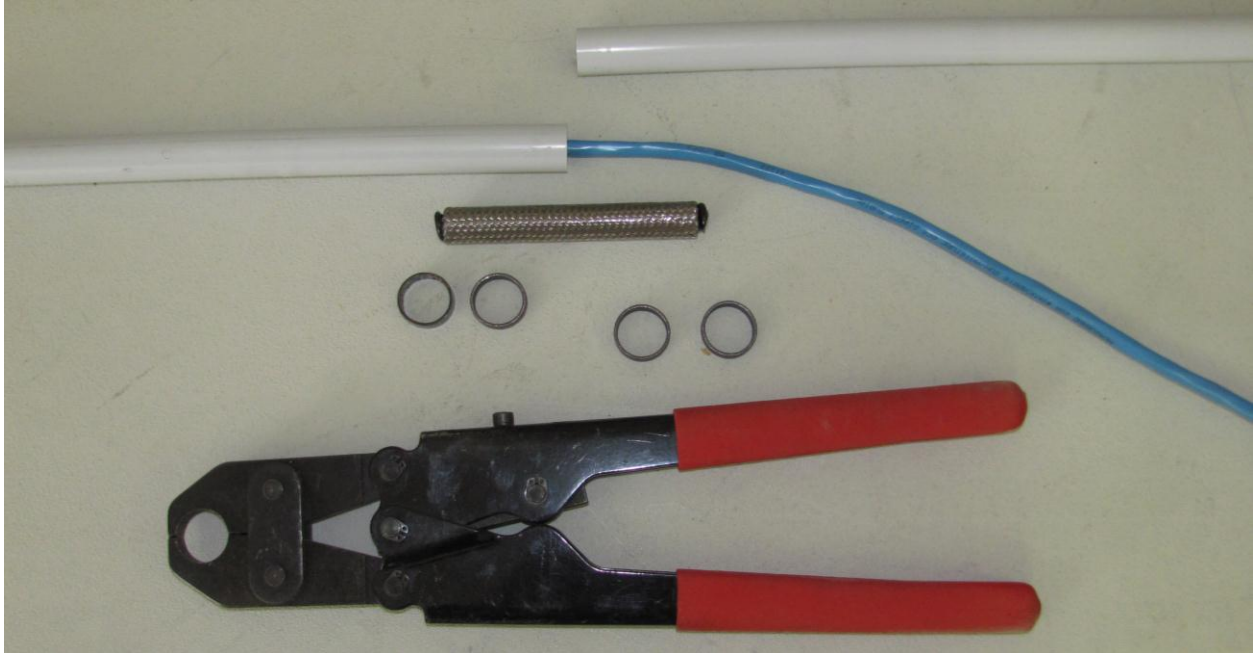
Step 1. Assemble the extra PEX, 1 PEX coupler, 4 PEX crimp rings, and place with SAA
